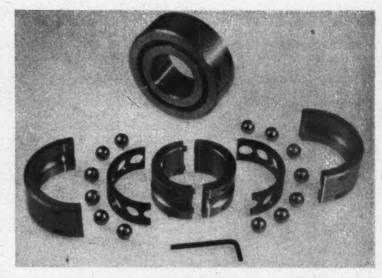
Double-fracture ball bearings of this type can be assembled in positions where solid-race bearings could not be employed
